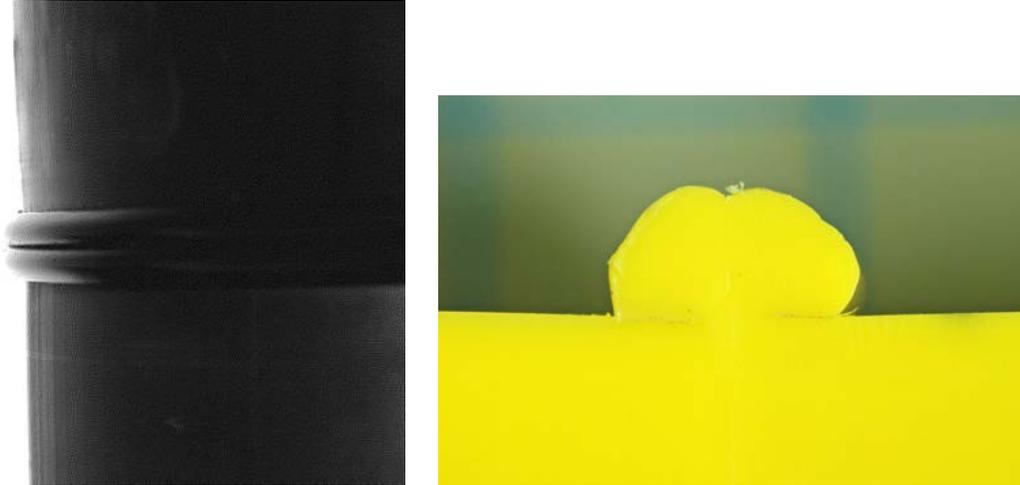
ACCEPTABLE APPEARANCE - Proper Double Roll-back Bead and Proper Alignment
